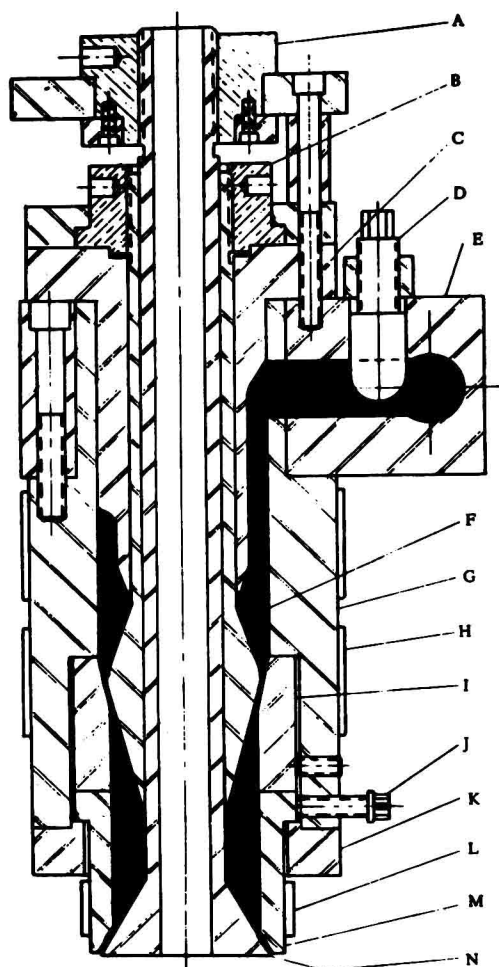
Typical blow-molding die: A, choke-adjusting nut; B, mandrel adjustment; C, feed throat; D, choke screw; E, die head; F, plastic melt; G, die barrel; H, heater band; I, choke ring; J, centering screw; K, clamp ring; L, die heater; M, die; N, mandrel. (Reprinted by permission of the publisher from J. D. Frankland, "A High Speed Blow Molding Process", *Trans. Soc. Rheol. (J. Rheol.)*, 19, 371, 1975.)
